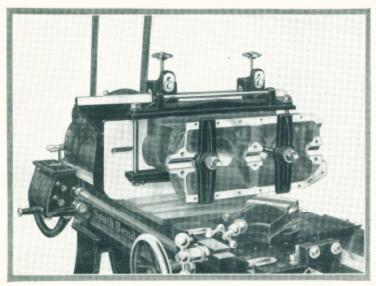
C-Method of Clamping Cylinder Block to Angle Plate.
